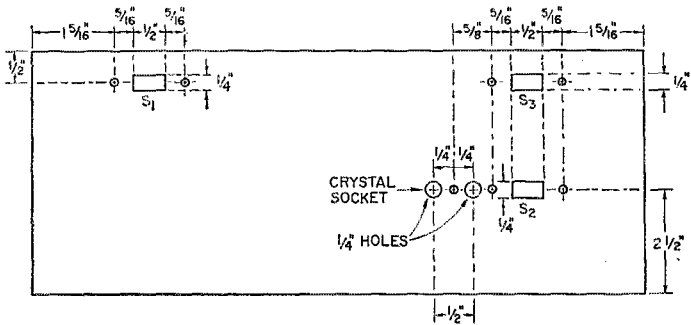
Sketch showing the location of panel cutouts and screw holes. Unless indicated otherwise, screw holes are clearance for 6-32 screws (No. 28 drill).
